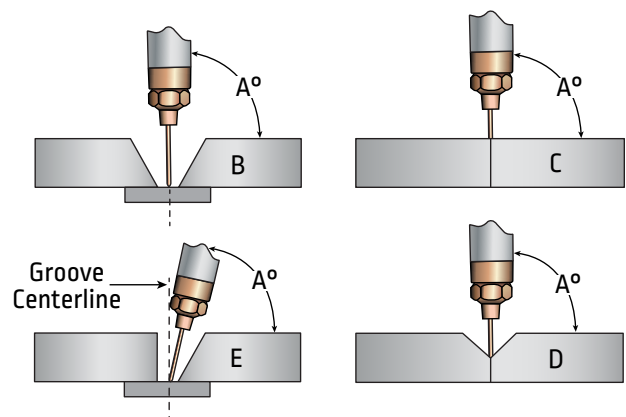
Electrode Location—Groove and Butt Welds
